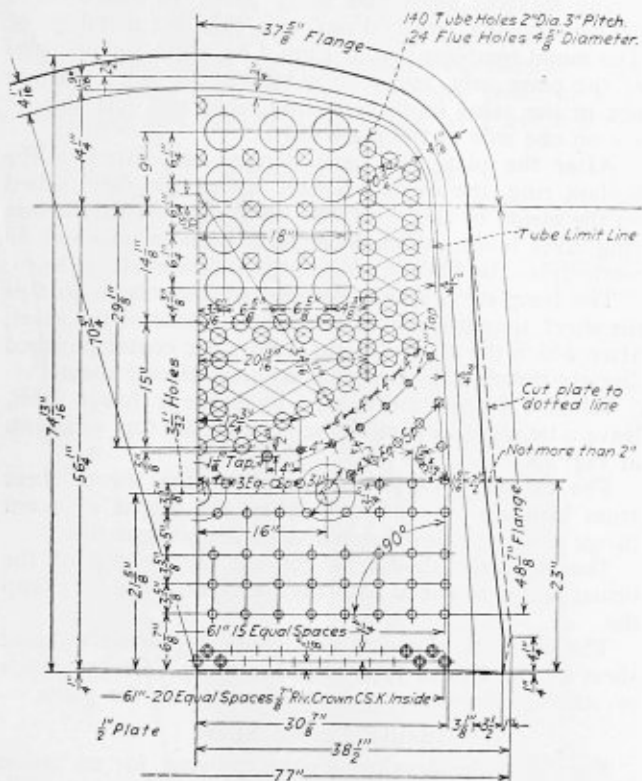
Firebox tube sheet. Type-A superheater flue arrangement
